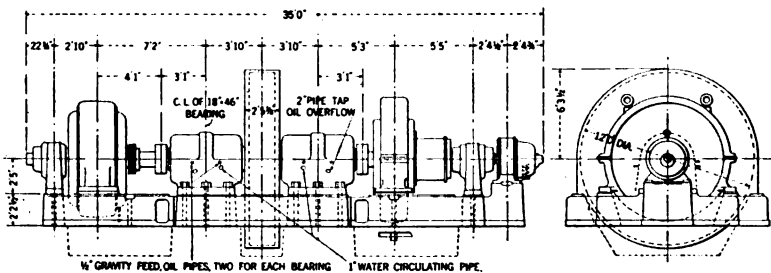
FLYWHEEL MOTOR-GENERATOR SET
